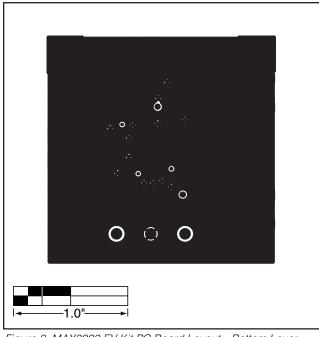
MAX9993 EV Kit PC Board Layout—Bottom Layer Metal
